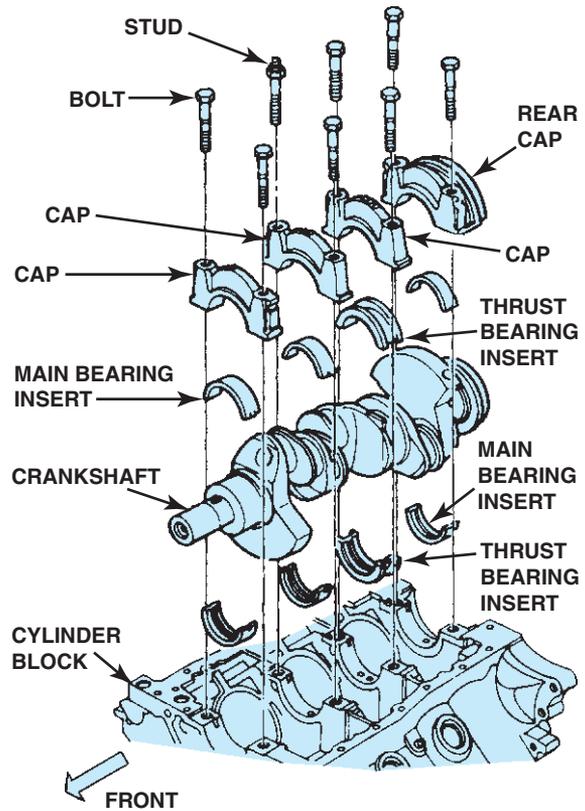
Two-bolt main bearing caps provide adequate bottom end strength for most engines.
